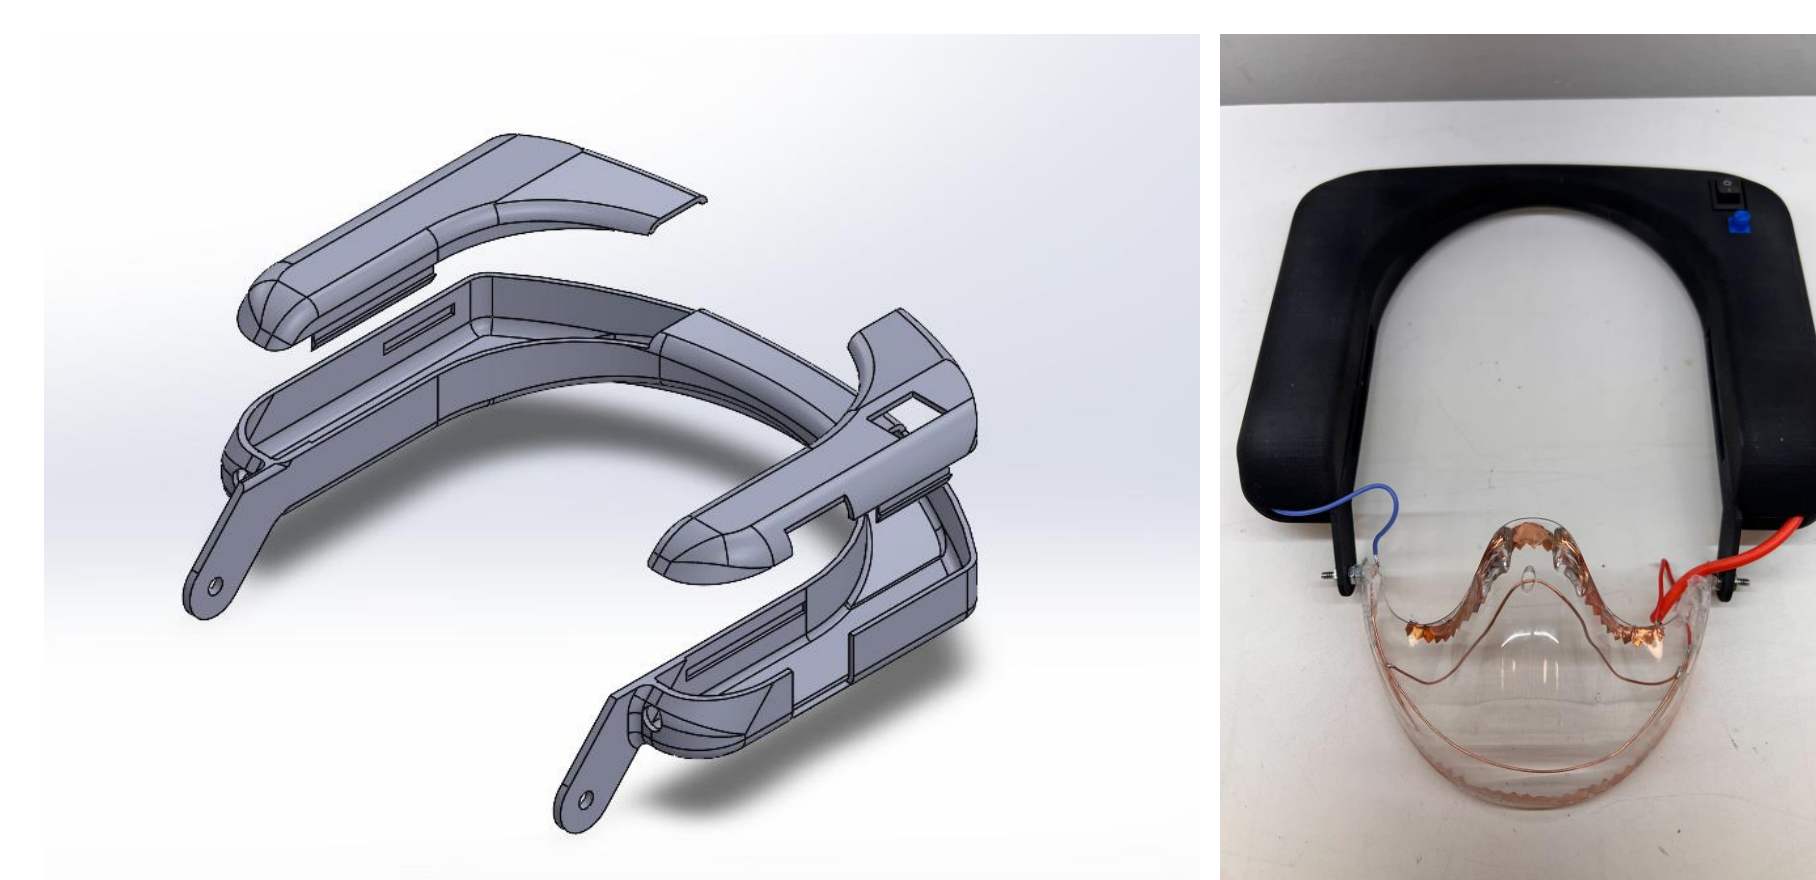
(Left) Exploded view of mask frame. (Right) Completed SINEW Mask with full-perimeter electrodes and SLS 3D printed mask frame.
